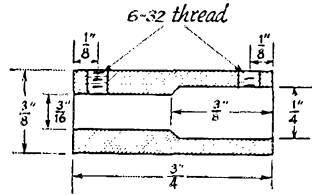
Cross-sectional view of $\frac{3}{16}$ -inch to $\frac{1}{4}$ -inch shaft coupling.
